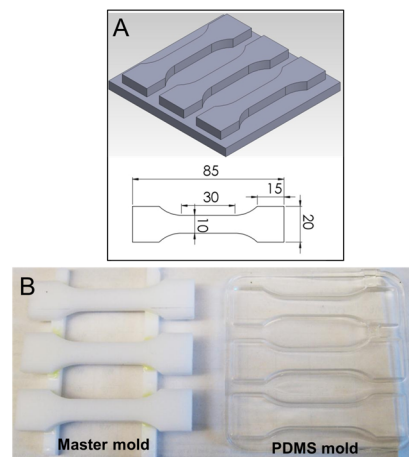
(A) 3D CAD model of the designed molds for tensile experiments; (B) Optical images of the machined master molds (left) and PDMS molds (right) for casting hydrogel specimens for tensile test.
